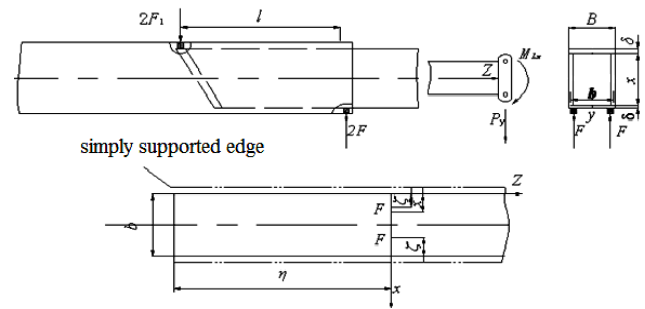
FORCE SKETCH OF FLANGE PLATE PRODUCED BY GUIDE SLIDERS
